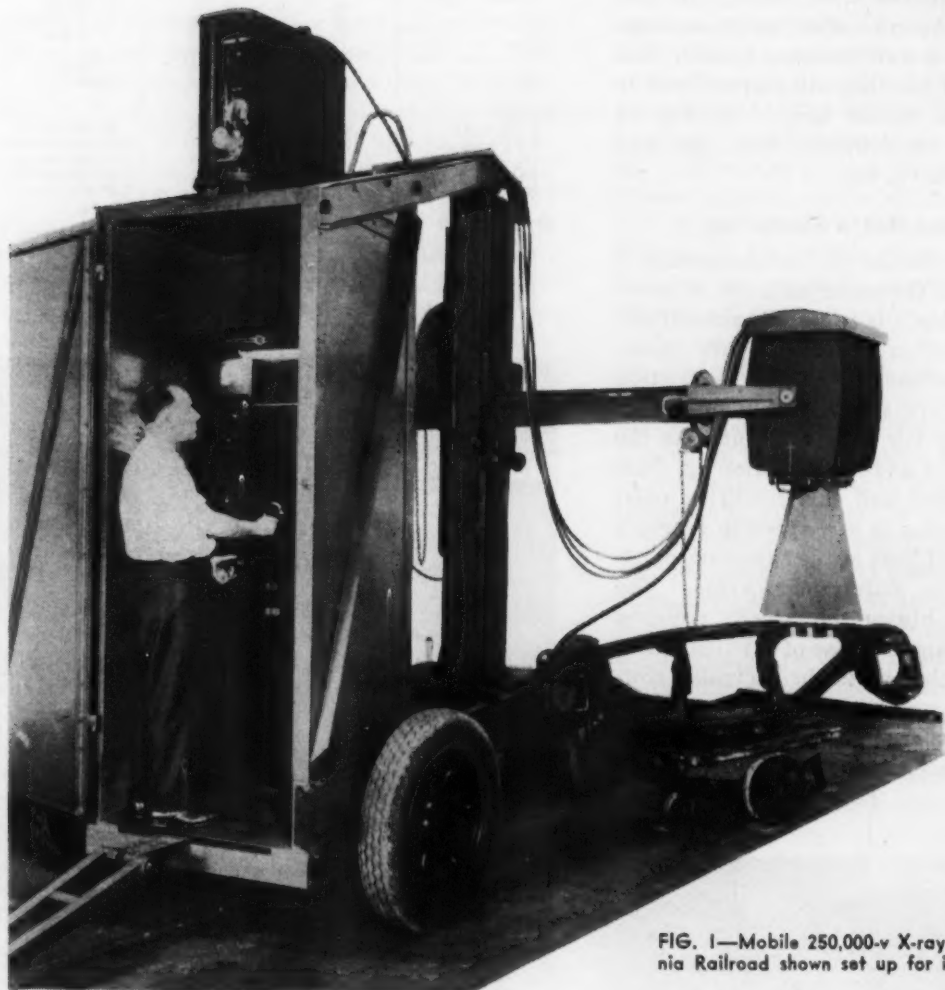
Mobile 250,000-v X-ray unit used by Pennsylvania Railroad shown set up for inspecting a side frame.
